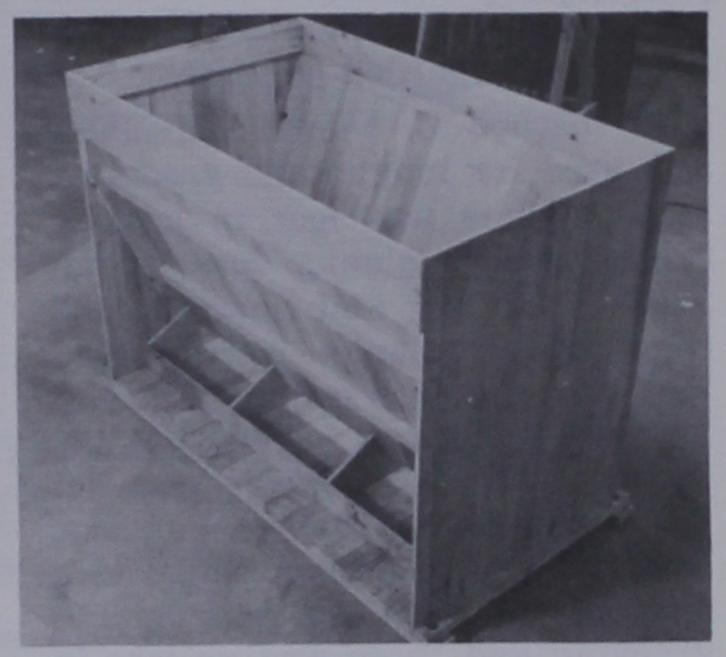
Assembled base, ends, and sides, ready for attachment of metal parts.
